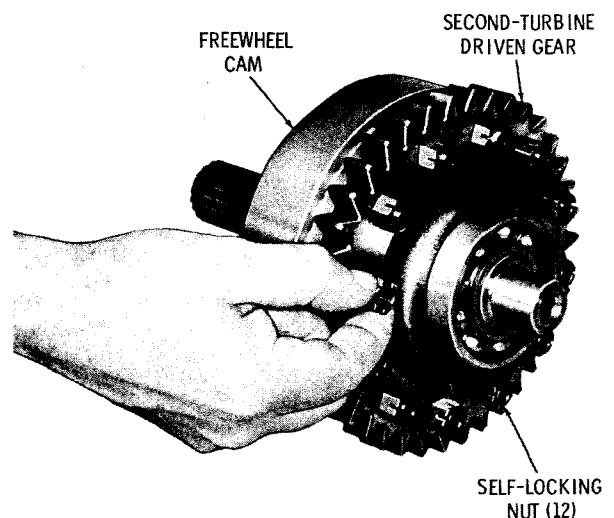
Installing self-locking nut onto freewheel cam bolt
